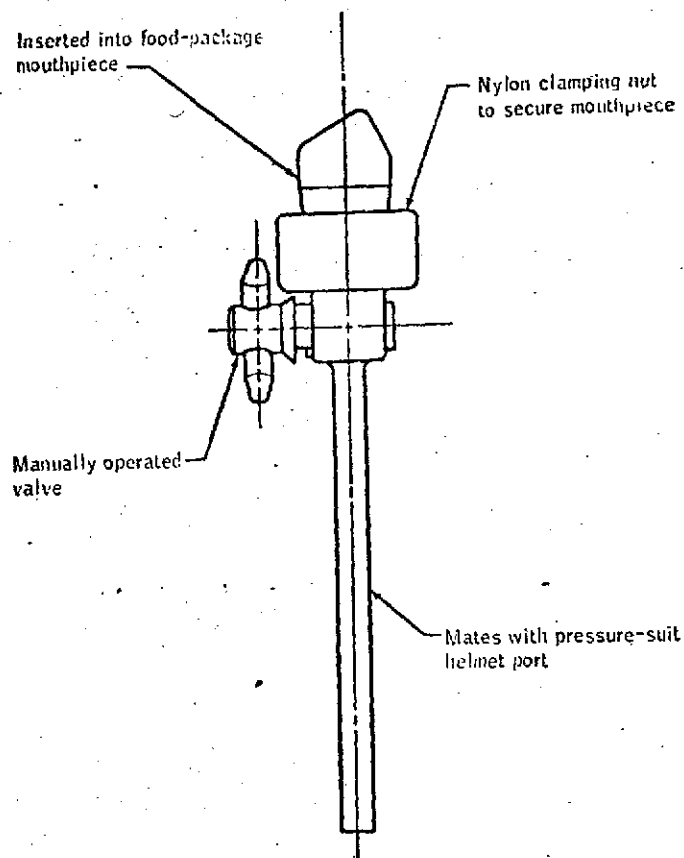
Pressure suit penetration tube with valve adapter for insertion into food package mouthpiece.
